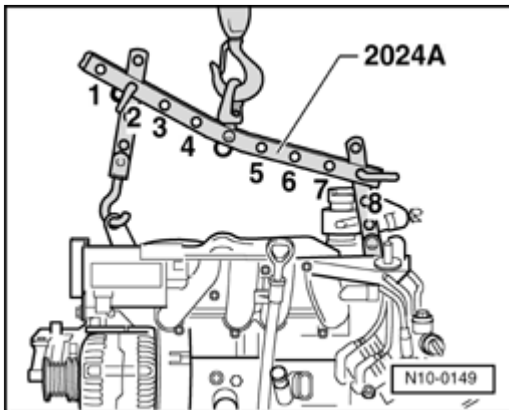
Identifying Lifting Tackle 2024A & Crane Attached to Engine
